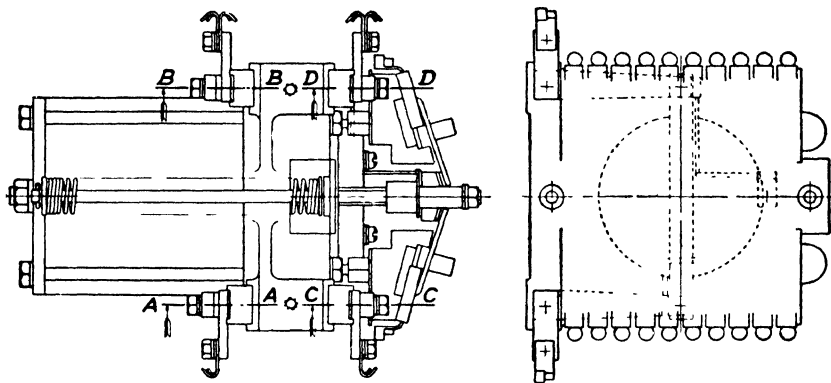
Method of Assembly of Coil Supports for Voltage Control Relay, Type 17LH22C1
